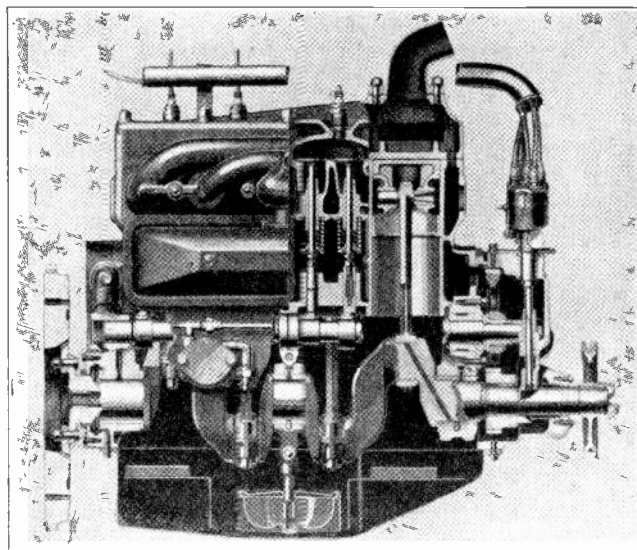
A. Side sectional view of Chrysler Plymouth four-cylinder engine showing the shape of the crank shaft and arrangement of pistons, valves, etc.
